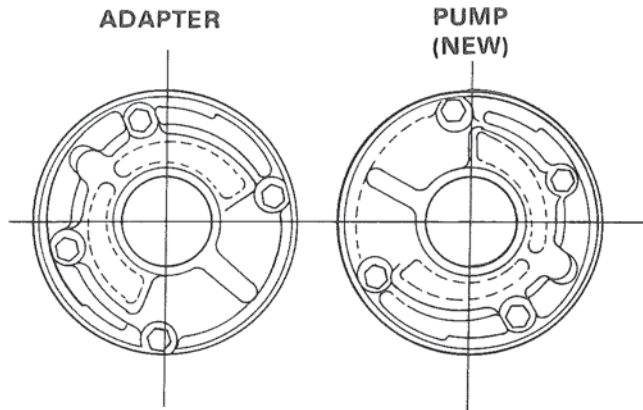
Orientation Markings for New 71-1A60 Pump Assembly on 71-8B Adapter.
